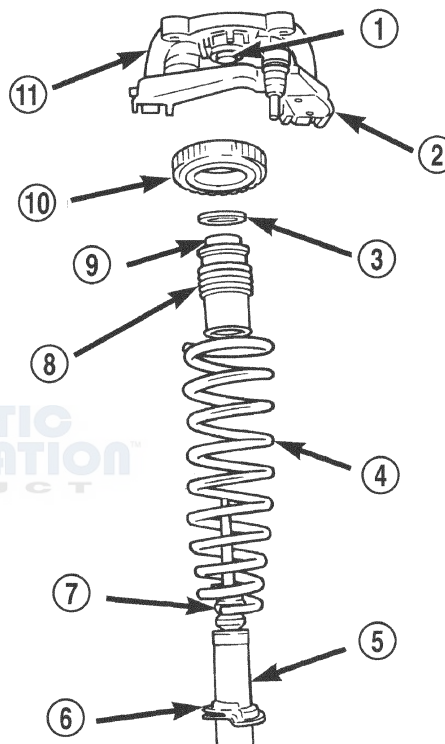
Shock Absorber Rod Lower Isolator Bushing
